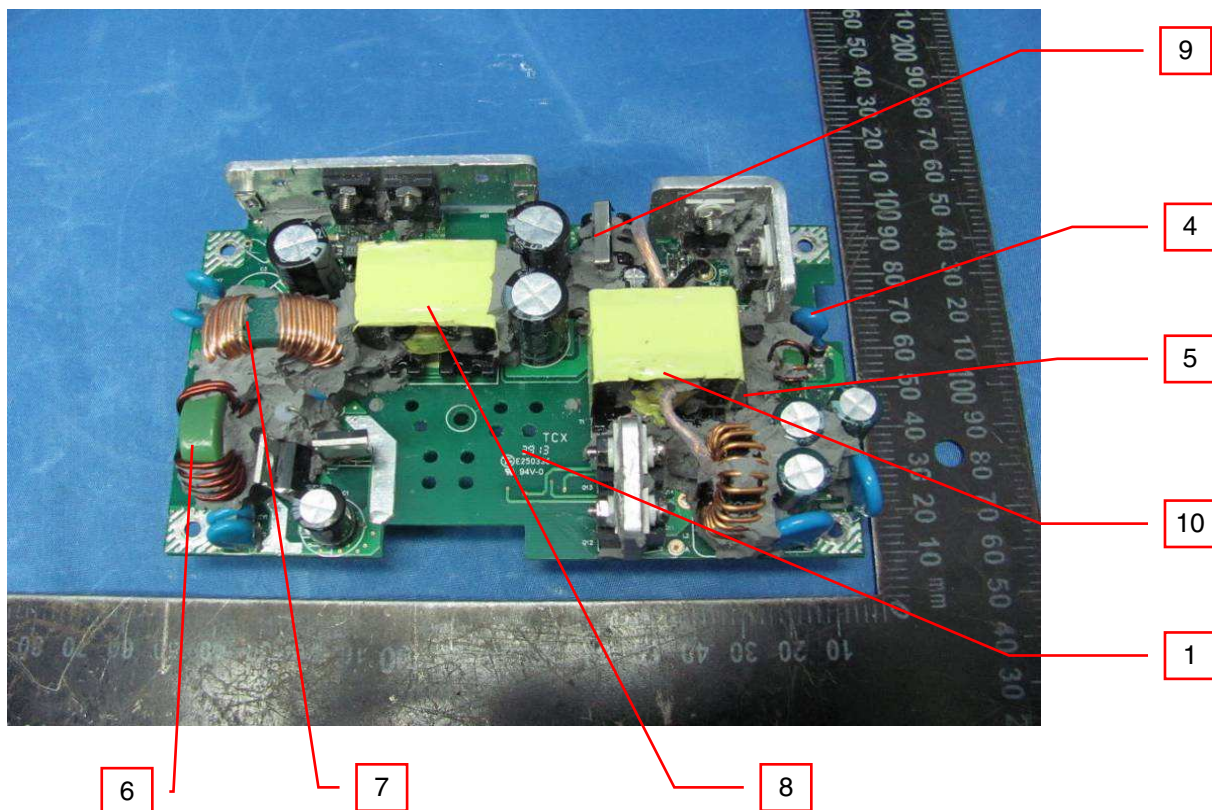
Internal view – Component side view of PCB for model GTD93035H6013.2-F
